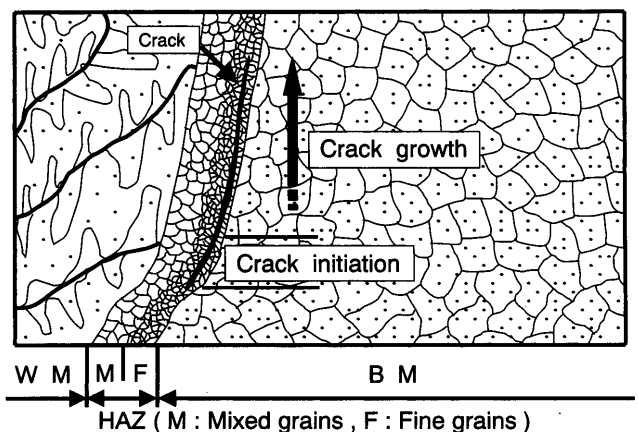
Schematic of the crack growth of type IV fractured specimen of welded joint.
